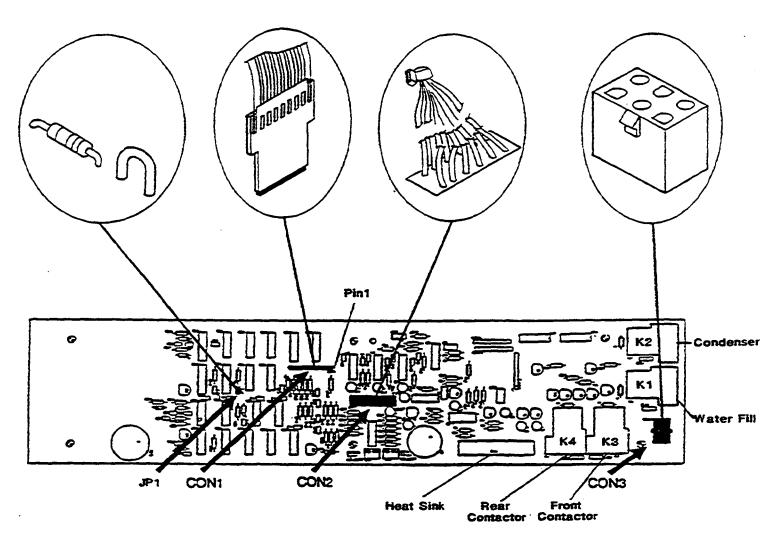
CONTROL BOARD PCB (pan # 101606)
